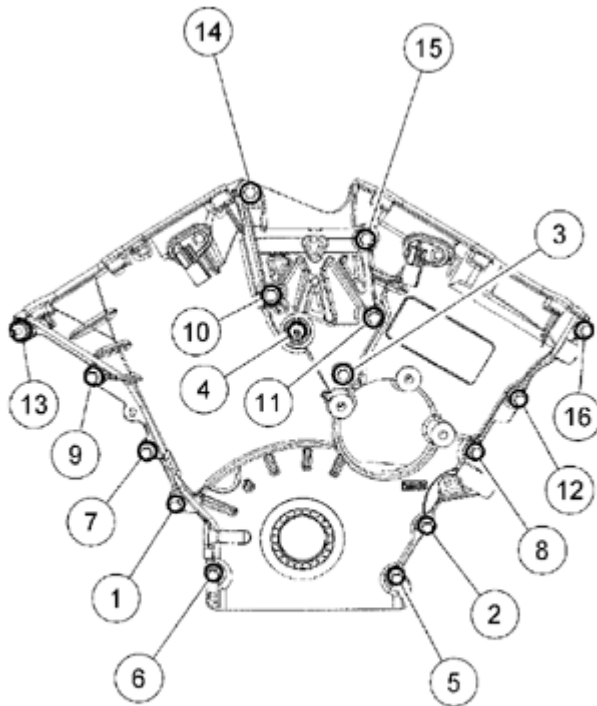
Identifying Engine Front Cover Bolts Tightening Sequence
